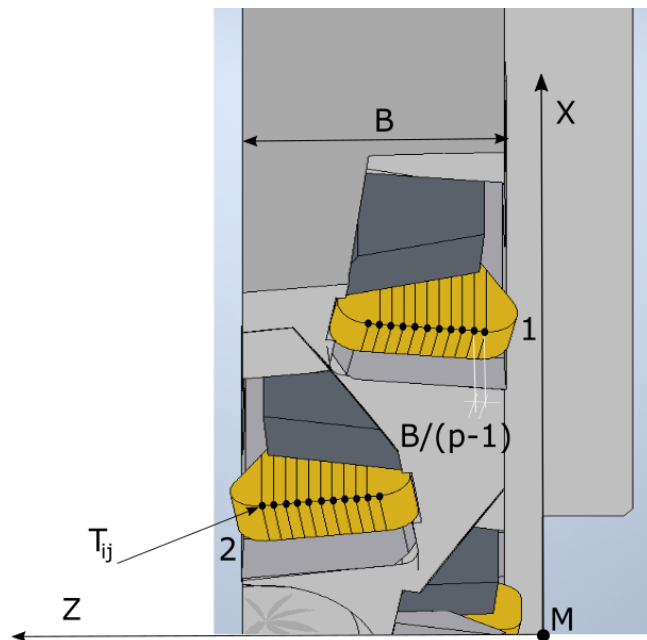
Analysed cross-section planes of the internal disc milling cutter, 1;2 – E-type cutting insert, shaping cylindrical surface of the crankpin, 5 – S-type cutting insert, shaping transition radius and web of crank
